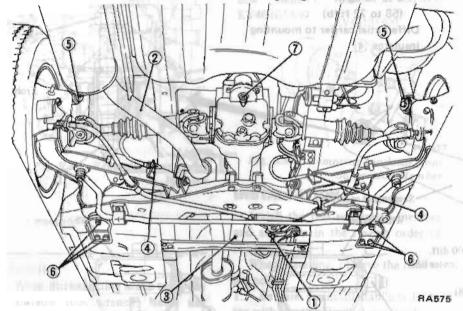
Suspension and Rear Axle Assembly Removal Points
